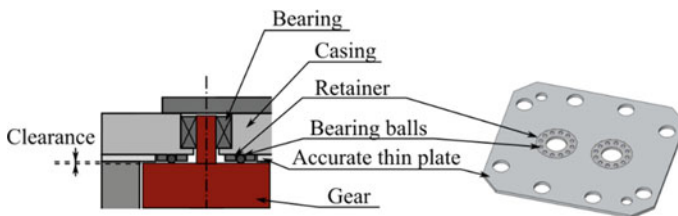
Layer of frameless thrust bearing inside external gear pump for accurate adjustment of internal gear side clearance
